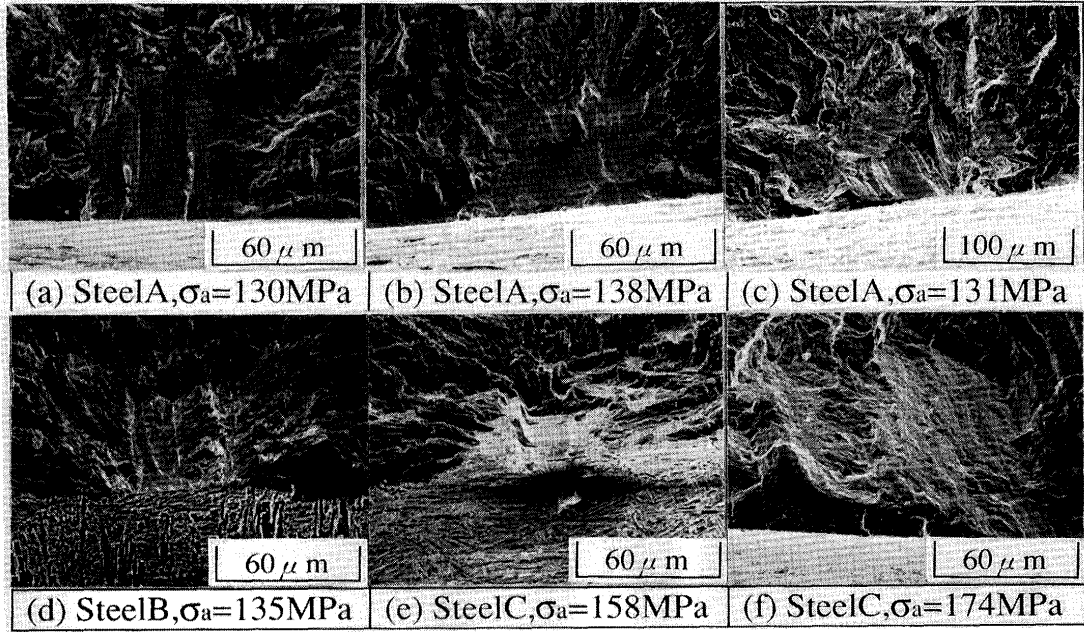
Fractographs of fatigue crack initiation in 1mmR notched round bar specimens.
